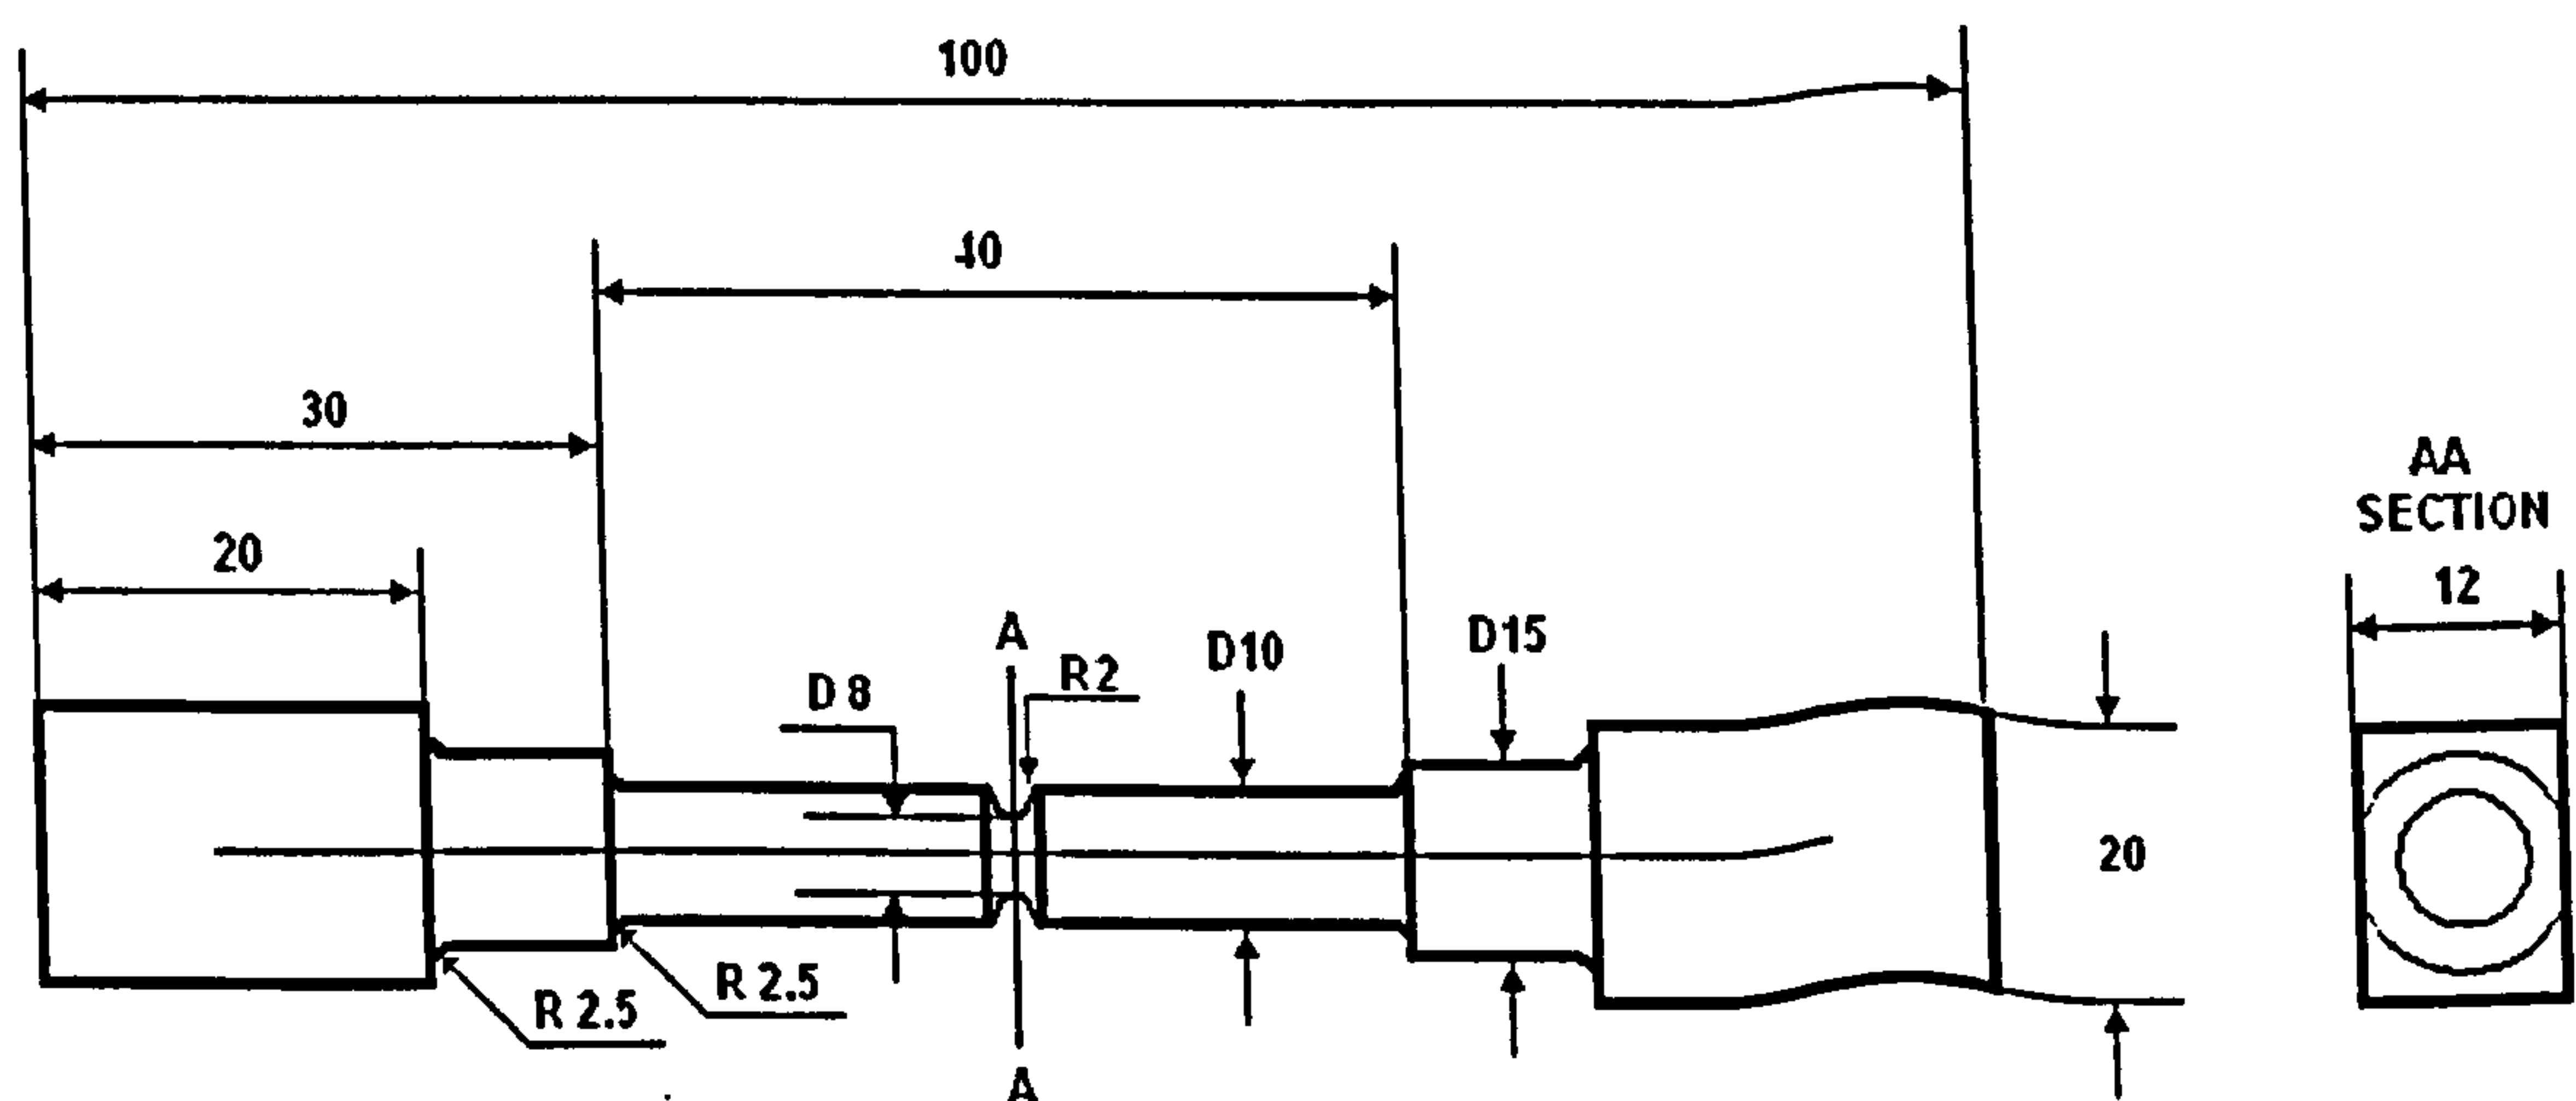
Geometry of notch bar tensile specimen with a notch radius of 2mm, all the dimensions are in mm.
